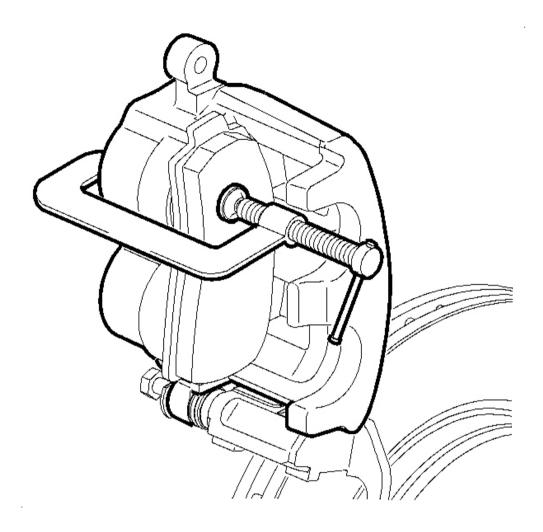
Installing C-Clamp Of Brake Caliper Courtesy of GENERAL MOTORS CORP.
